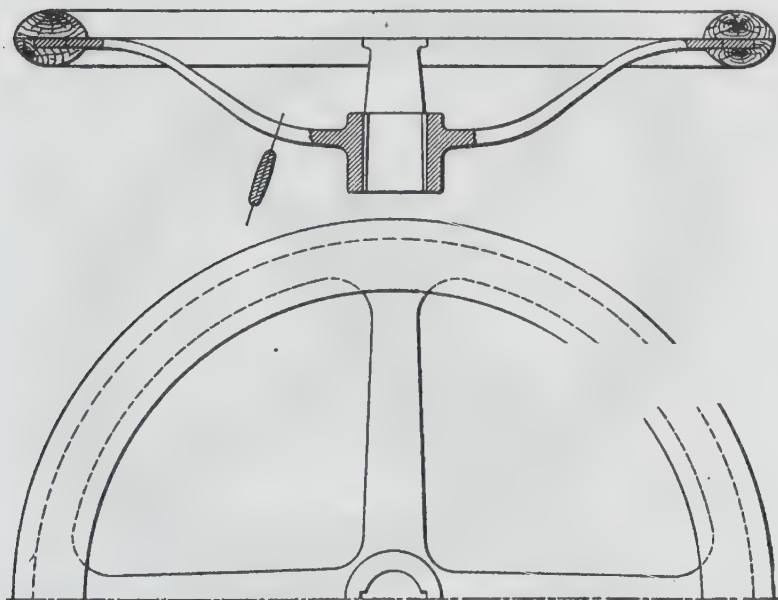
STEERING WHEEL WITH LAMINATED WOOD RIM AND OVAL ARM SPIDER WITH INTEGRAL RIM.
